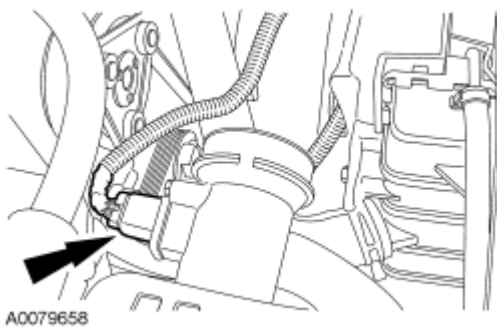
Locating Coolant Reservoir-To-Engine Supply Hose
